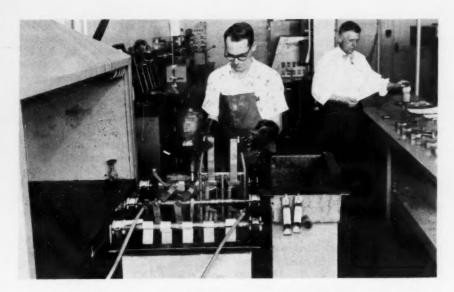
View of tank with two bluckets in position and two more being placed on work rod.
